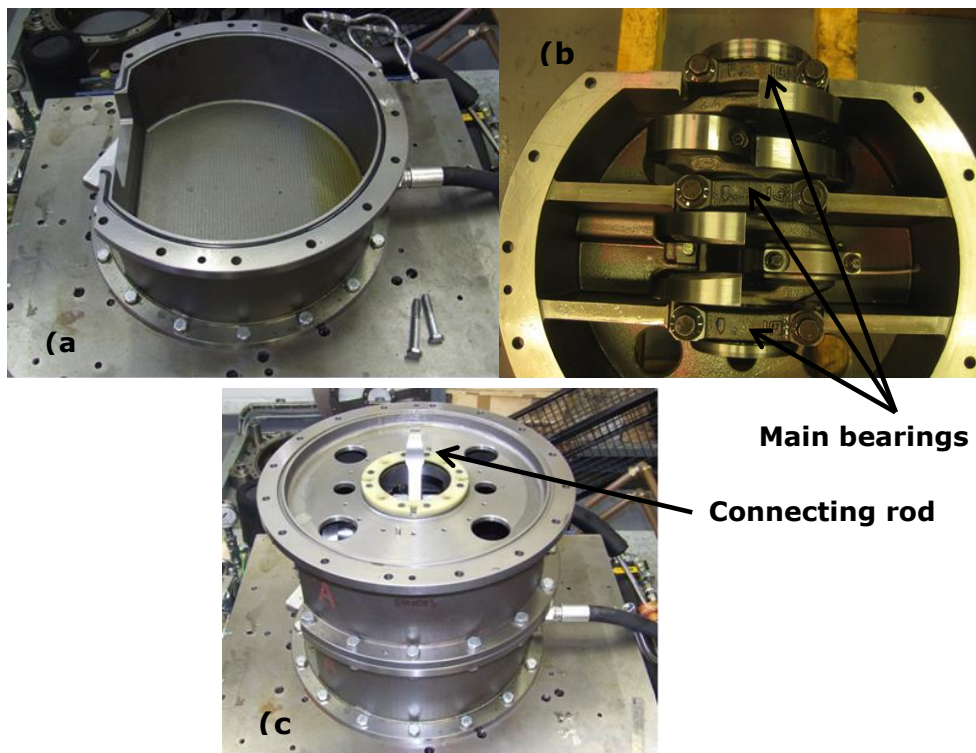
(a) Bottom casting/sump, (b) crank shaft with connecting rod assembled in crank casting, and (c) crank casting fixed on sump.
